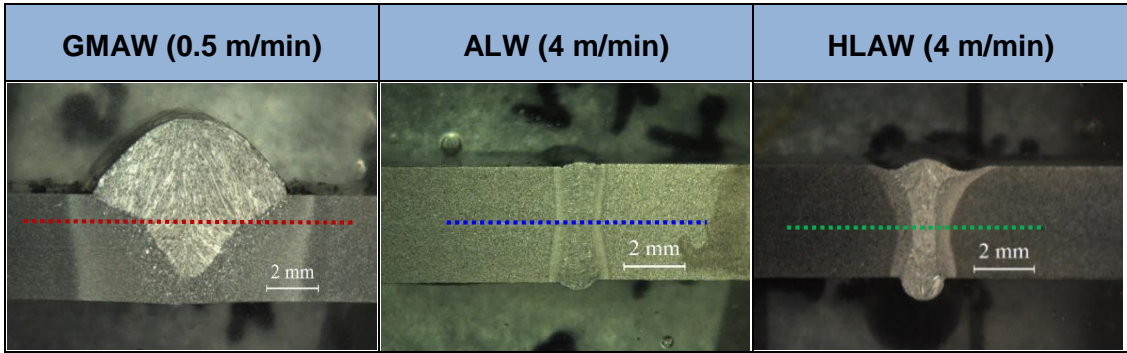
Macrographs of weld joints and marked hardness measurement location in 4 mm thick joints – Process (Travel speed)
